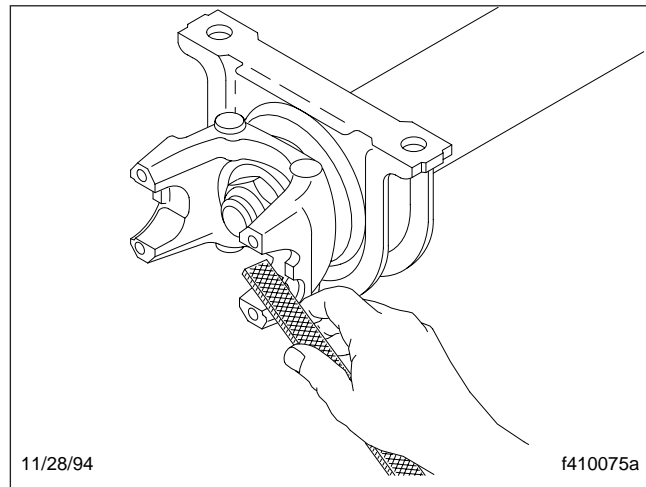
, Removing Burrs From a Half-Round End-Yoke Cross-Hole
